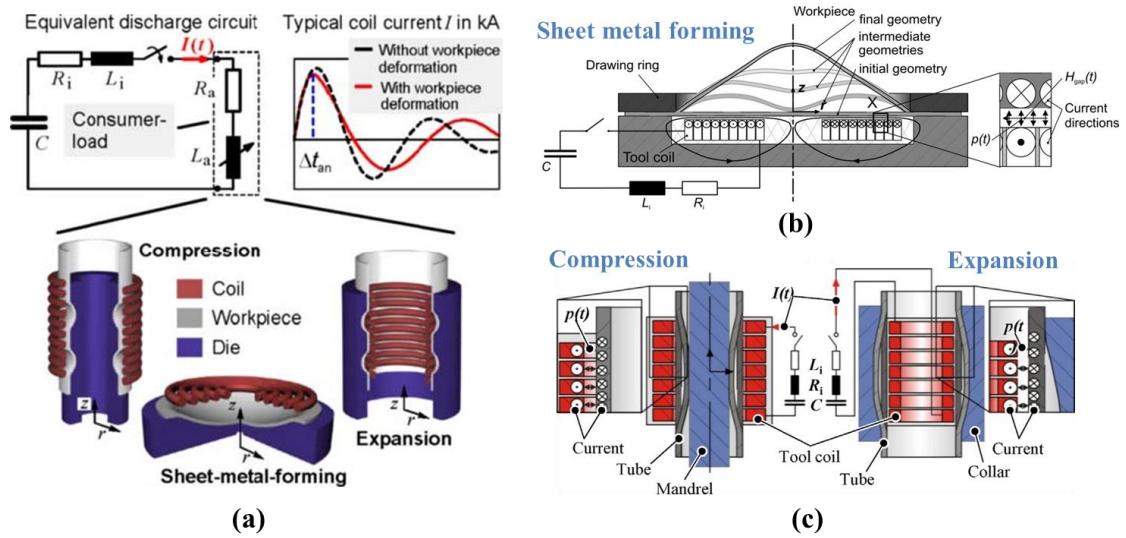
Classification and principle of electromagnetic forming: (a) typical EMF systems and coils types [182], (b) electromagnetic sheet metal forming [11], (c) electromagnetic compression and expansion [183].
